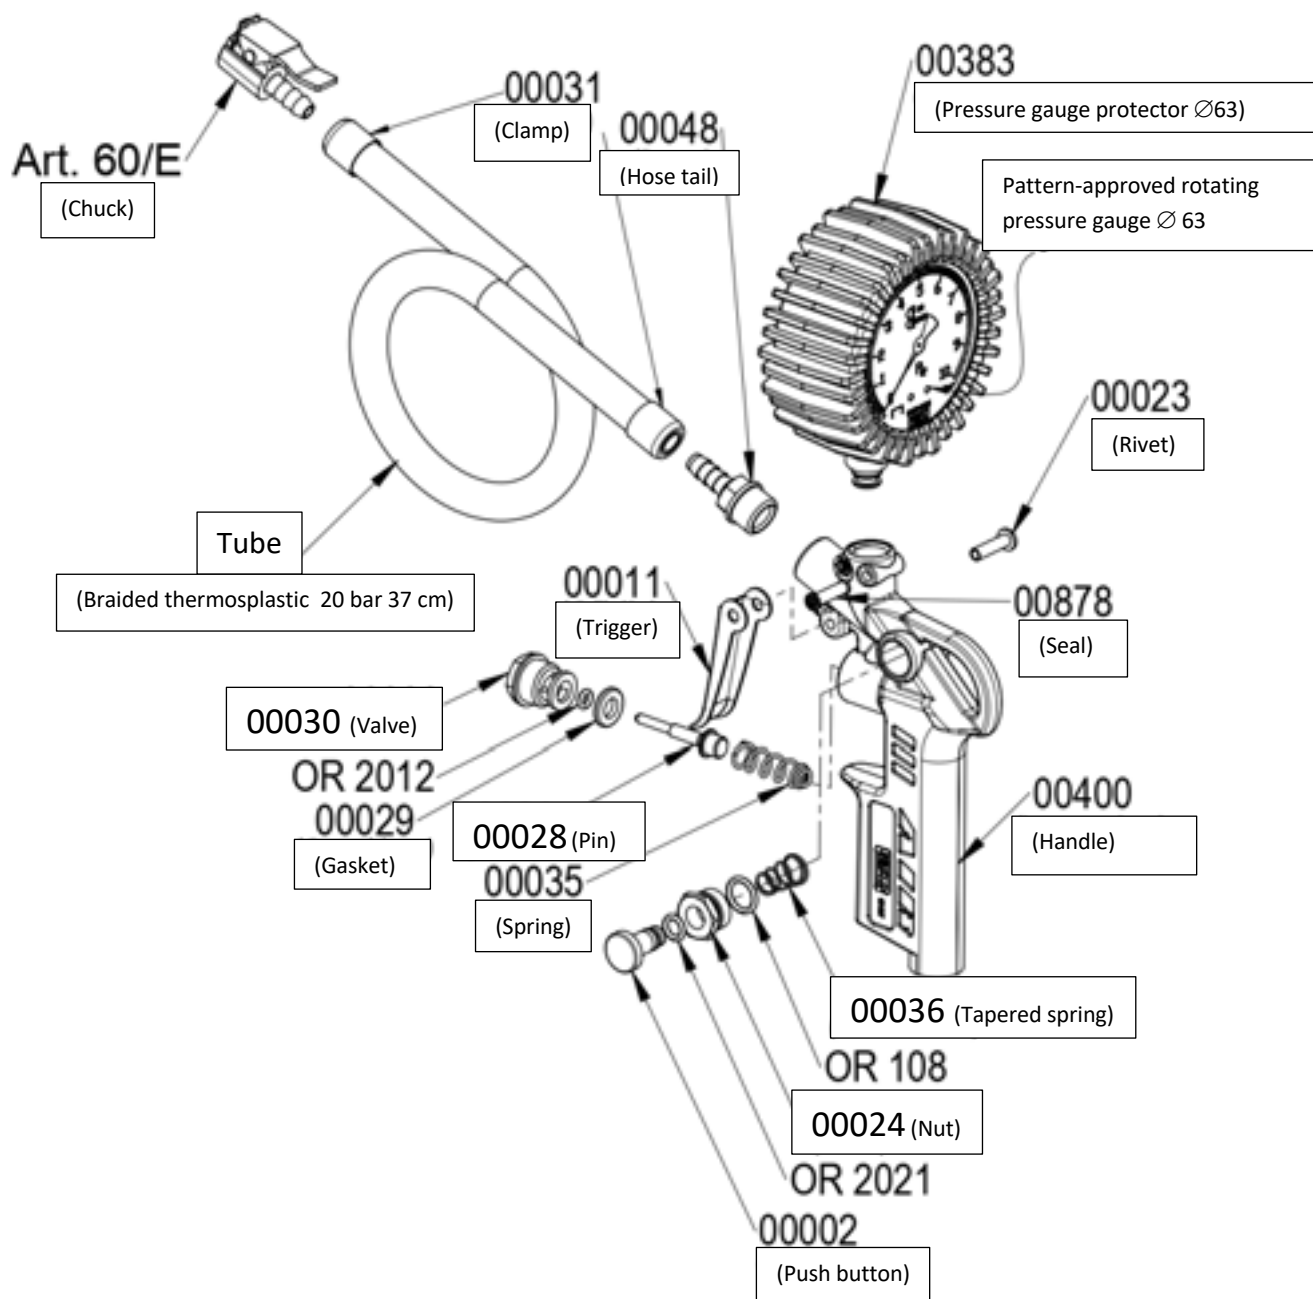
EXPLODED VIEW OF TYRE PRESSURE GAUGE “60 D/T” (vers. 63 mm)
